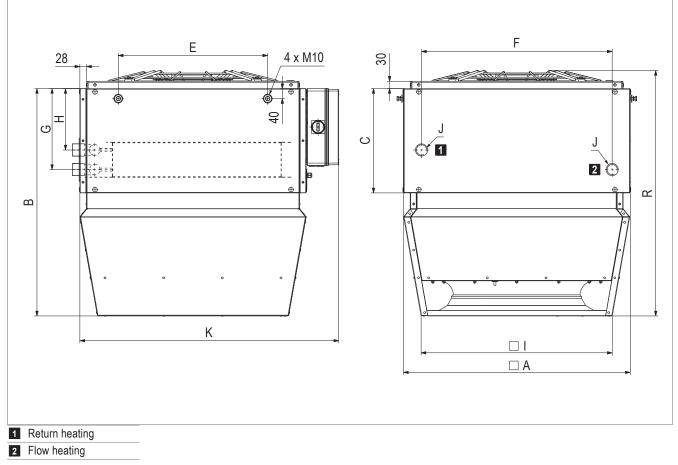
TopVent<sup>®</sup> TH dimensional drawing
